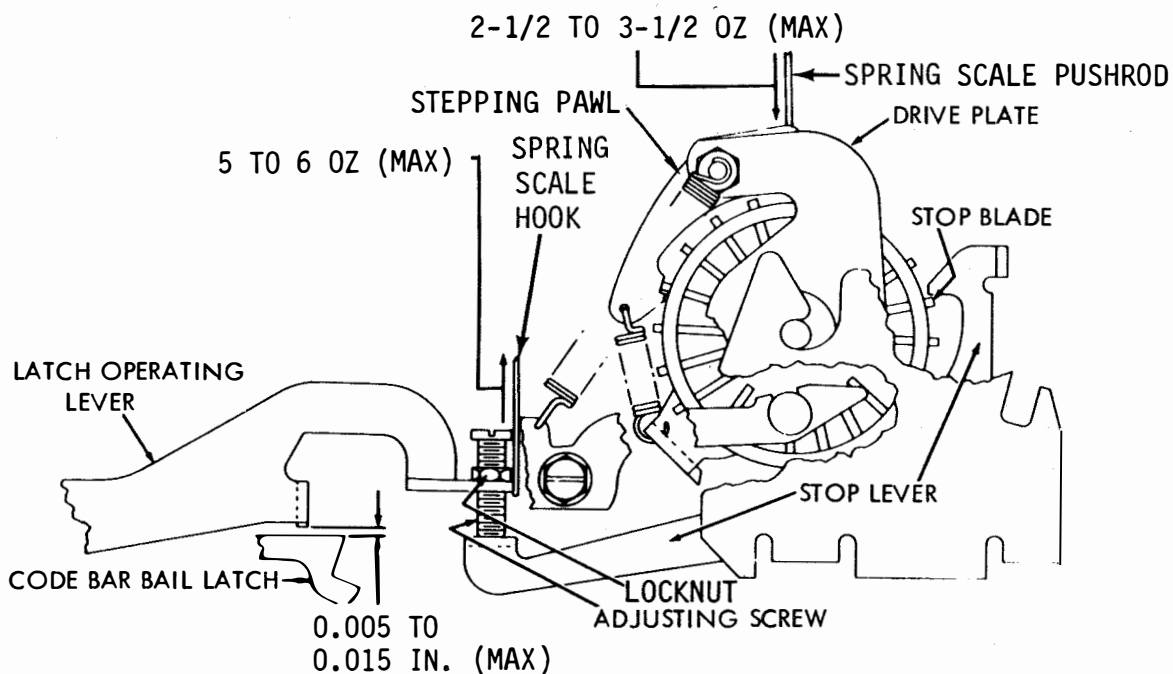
Stepping Pawl Spring, Latch Operating Lever Spring, and Latch Operating Lever Adjusting Screw
